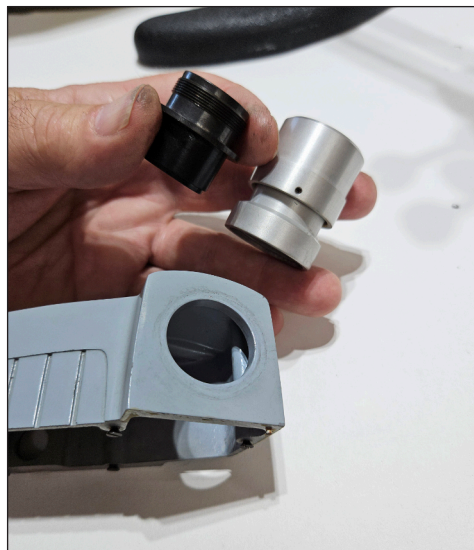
Two part eyepiece tube after removal of solder and cleanup
